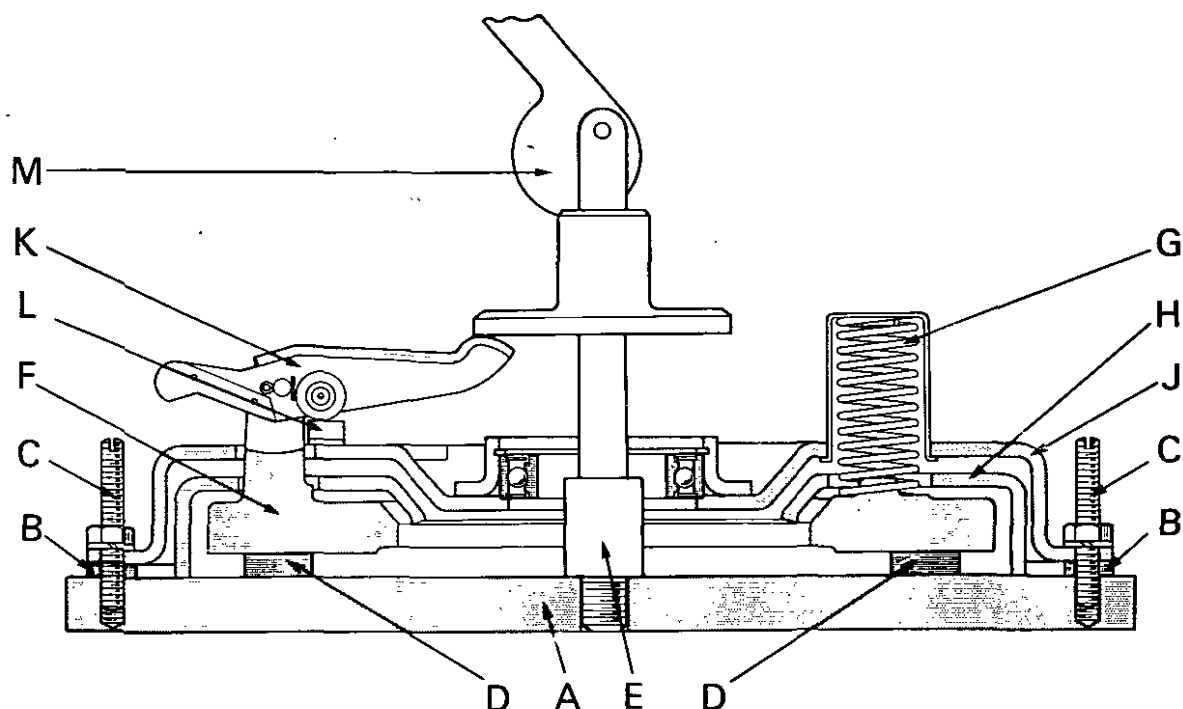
ASSEMBLING A DOUBLE CLUTCH — BORG AND BECK
